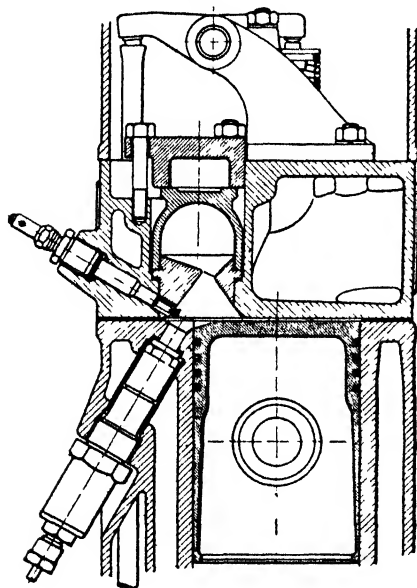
The Bosch Acro External-type Pre-combustion Head.
